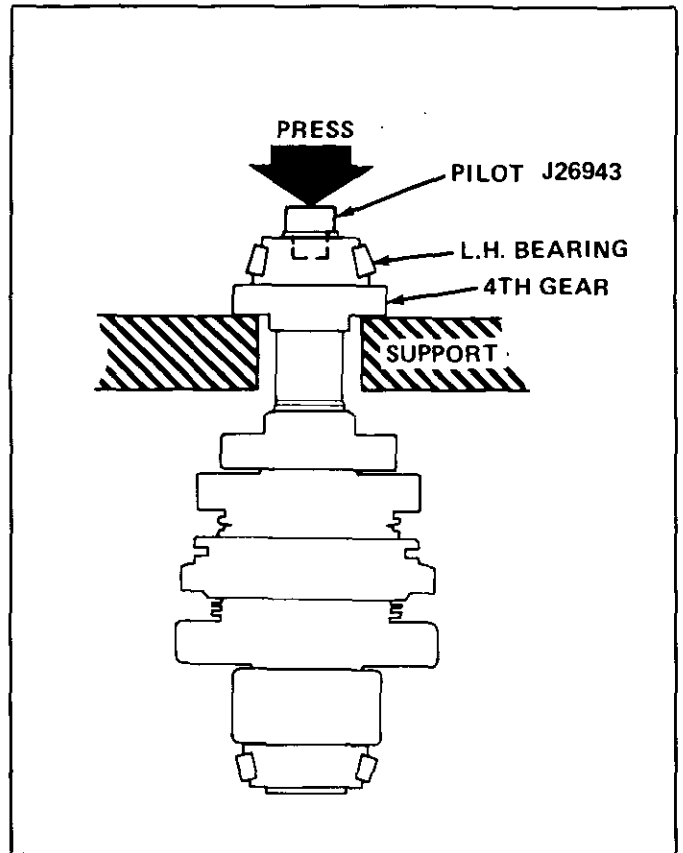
Removing L.H. Brg. and 4th Gear (Output)
